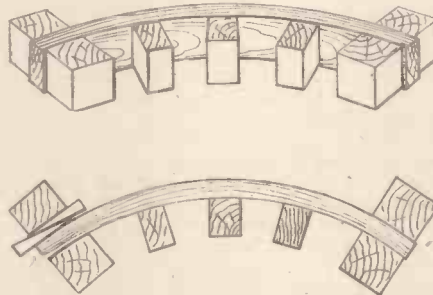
Wood strip being bent between formers fastened to bench-top.
